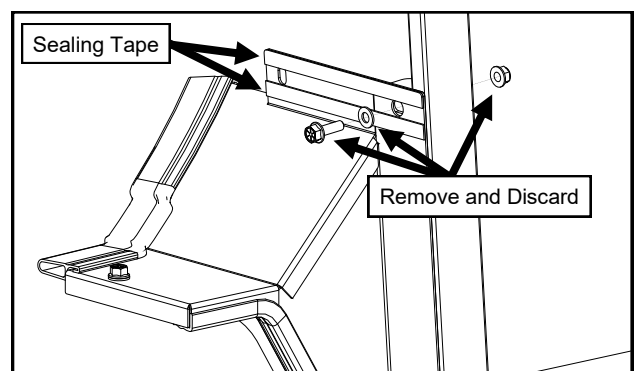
(Rear Leg to Side Frame Shipping Fasteners)
